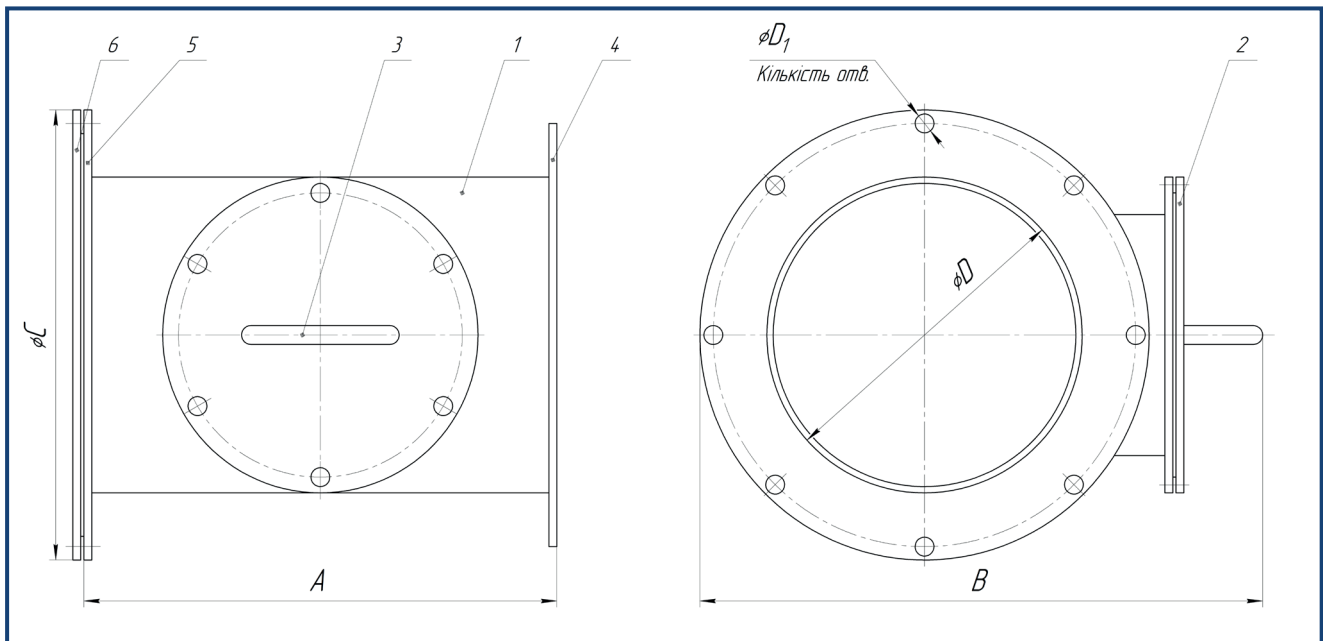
The LKV hatch insert consists of the following main components parts and assemblies: 1-body-tee, 2-cover, 3-handle, 4-flange, 5-flange, 6- matching flange
